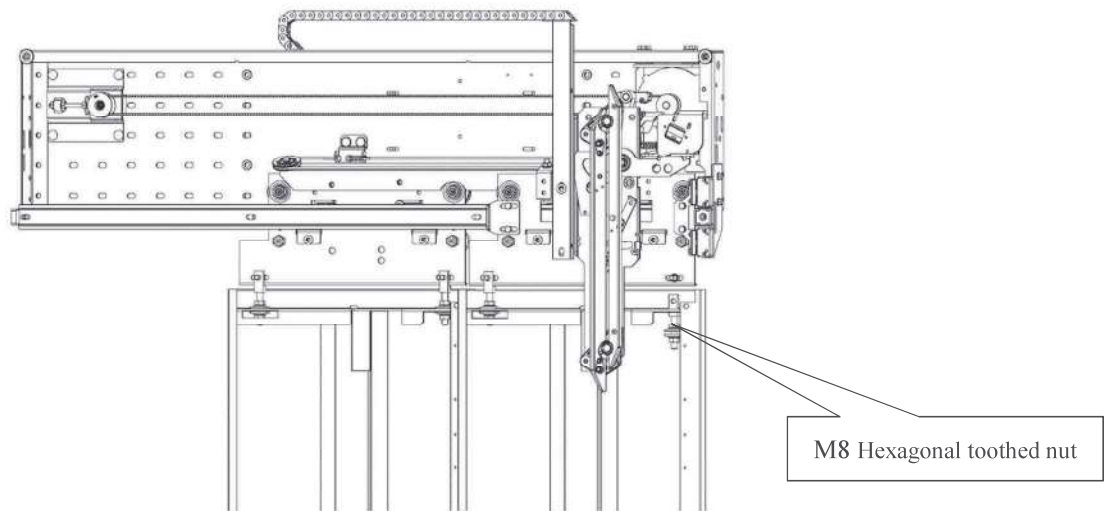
Adjustment of horizontal positions of the car door panels
